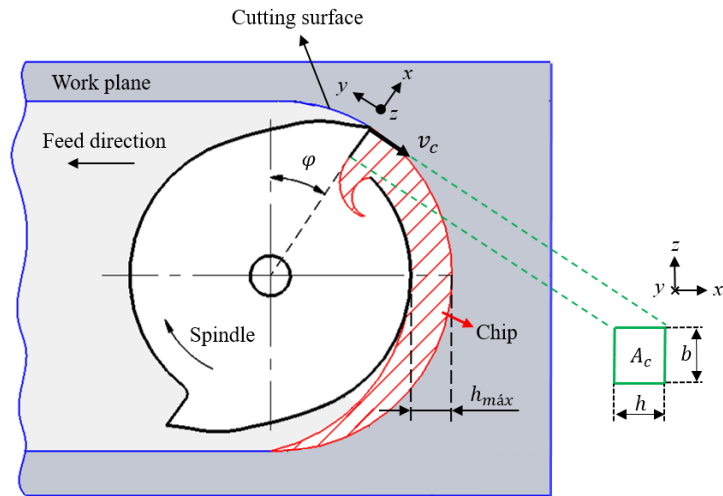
Chip formation mechanism for a straight-flute cutter in slot milling
